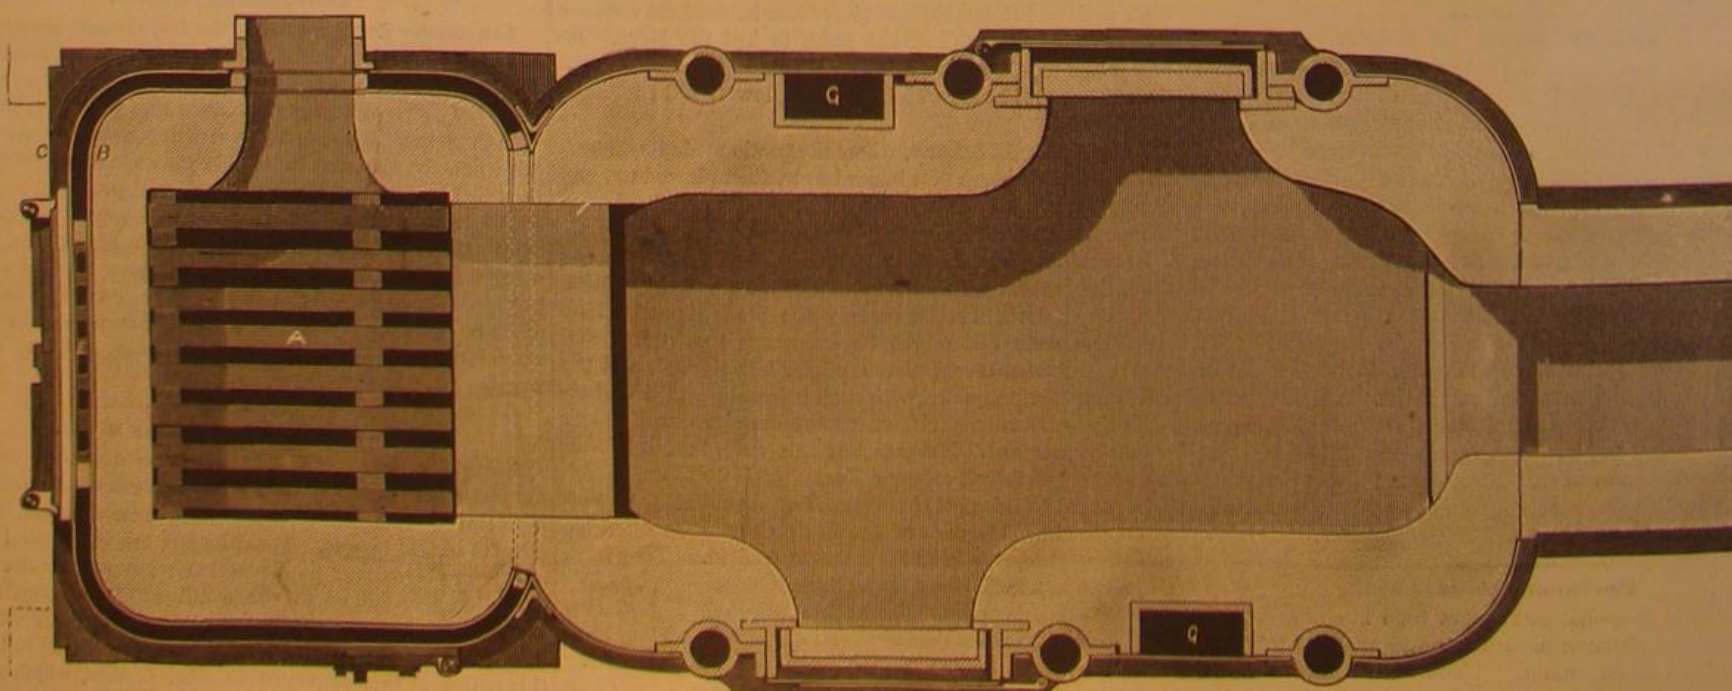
CADDICK AND MAYBERRY PUDDLING FURNACE.—SECTIONAL PLAN.
